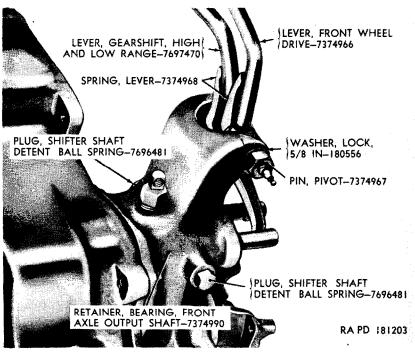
Transfer high and low range gearshift lever and front wheel drive lever installed.
